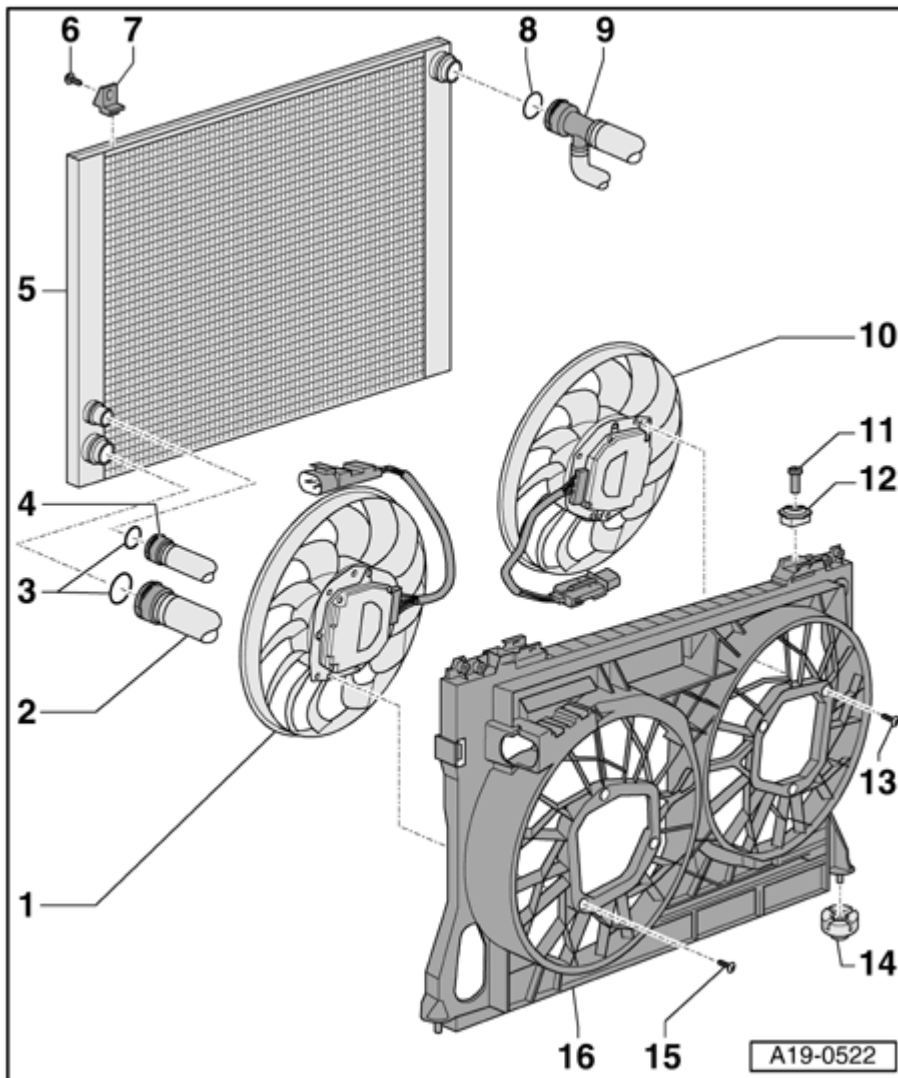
Radiator And Coolant Fan, Assembly Overview
